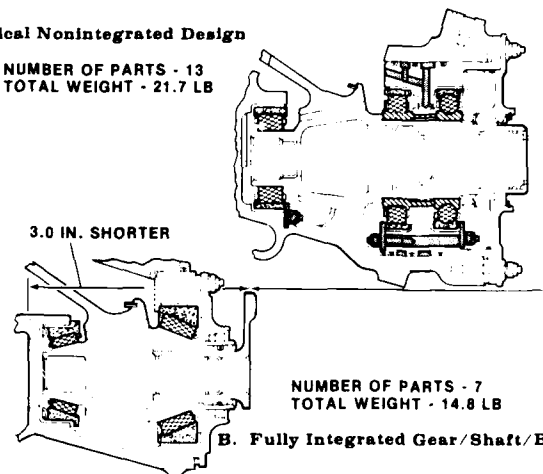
Representative Integral Spiral Bevel Gears for the CH-47D Helicopter
